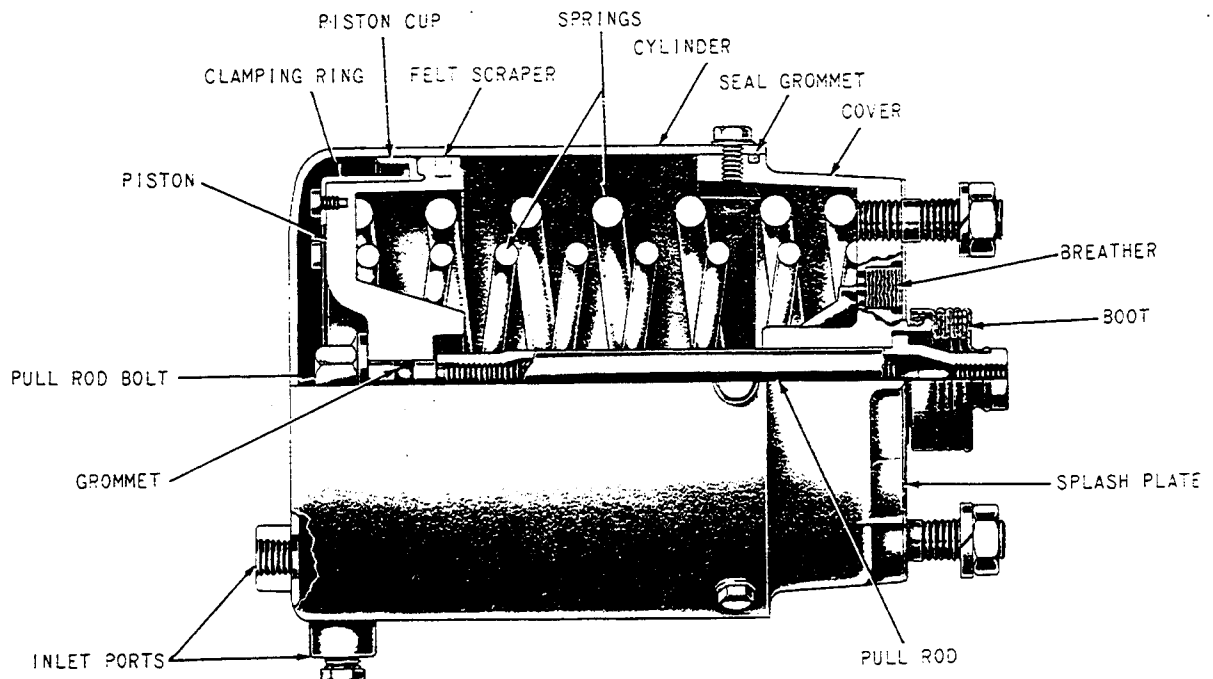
SECTIONAL VIEW SPRING BRAKE ACTUATOR
